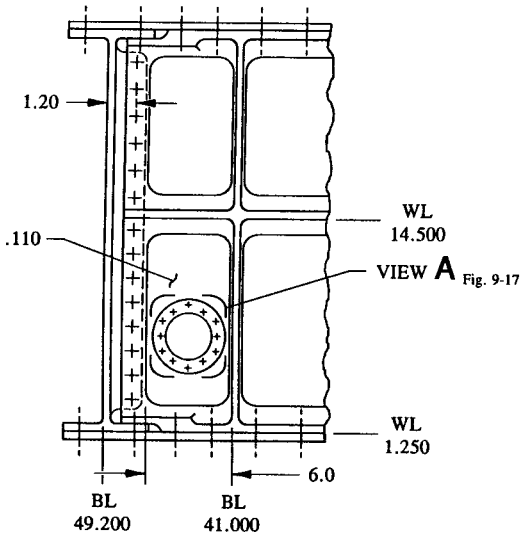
Reinforced hole with a riveted ring doubler in a machined forged rib.
